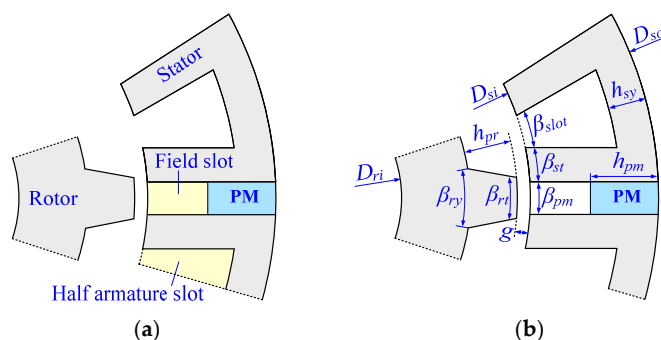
Configuration and design dimensions of PM-top HEFS machine. (a) Configuration; (b) Design dimensions.
